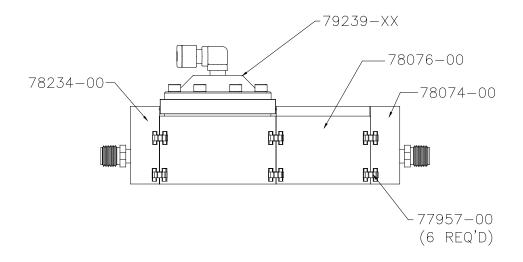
78235-00 Regulator & Flow Meter Stand-Alone Assembly
